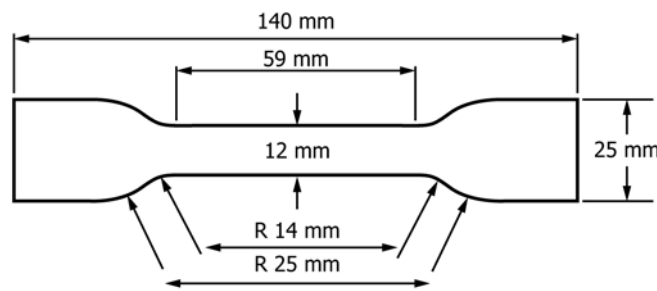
Die for Stamping Tensile Dumbbell Specimens—D412A Die
